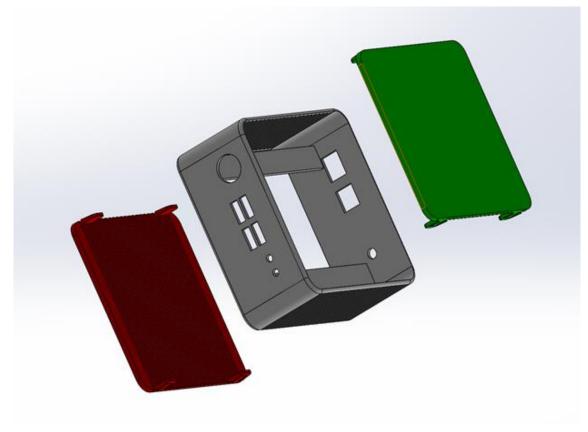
3D exploded view of the theoretical product 圖13 理論產品3D分解圖
